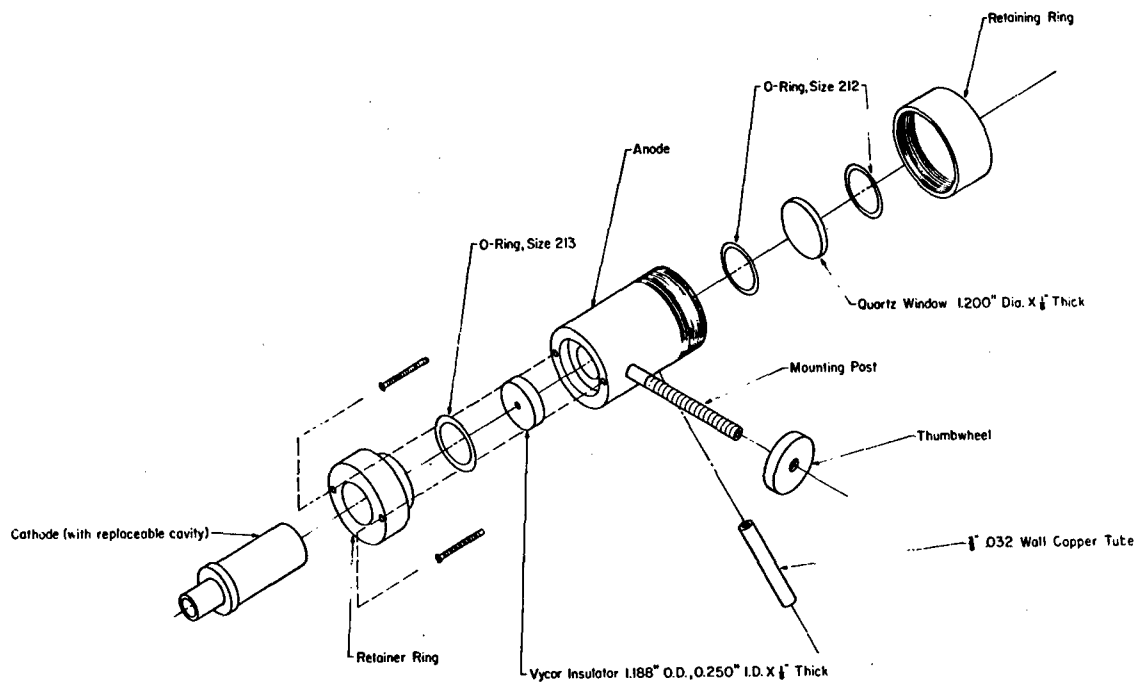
EXPLODED VIEW OF LIGHT SOURCE
